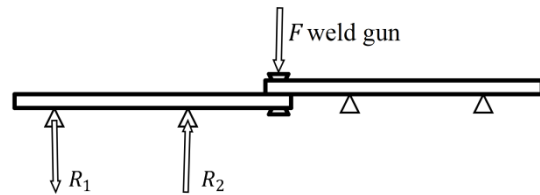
Deflection on sheet metal applied by force of welding gun
